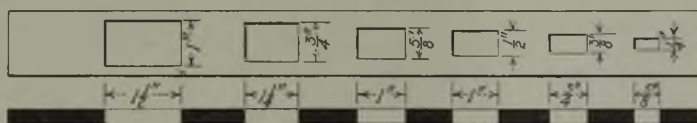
Sizing Gage Makes Work Easier and More Exact
